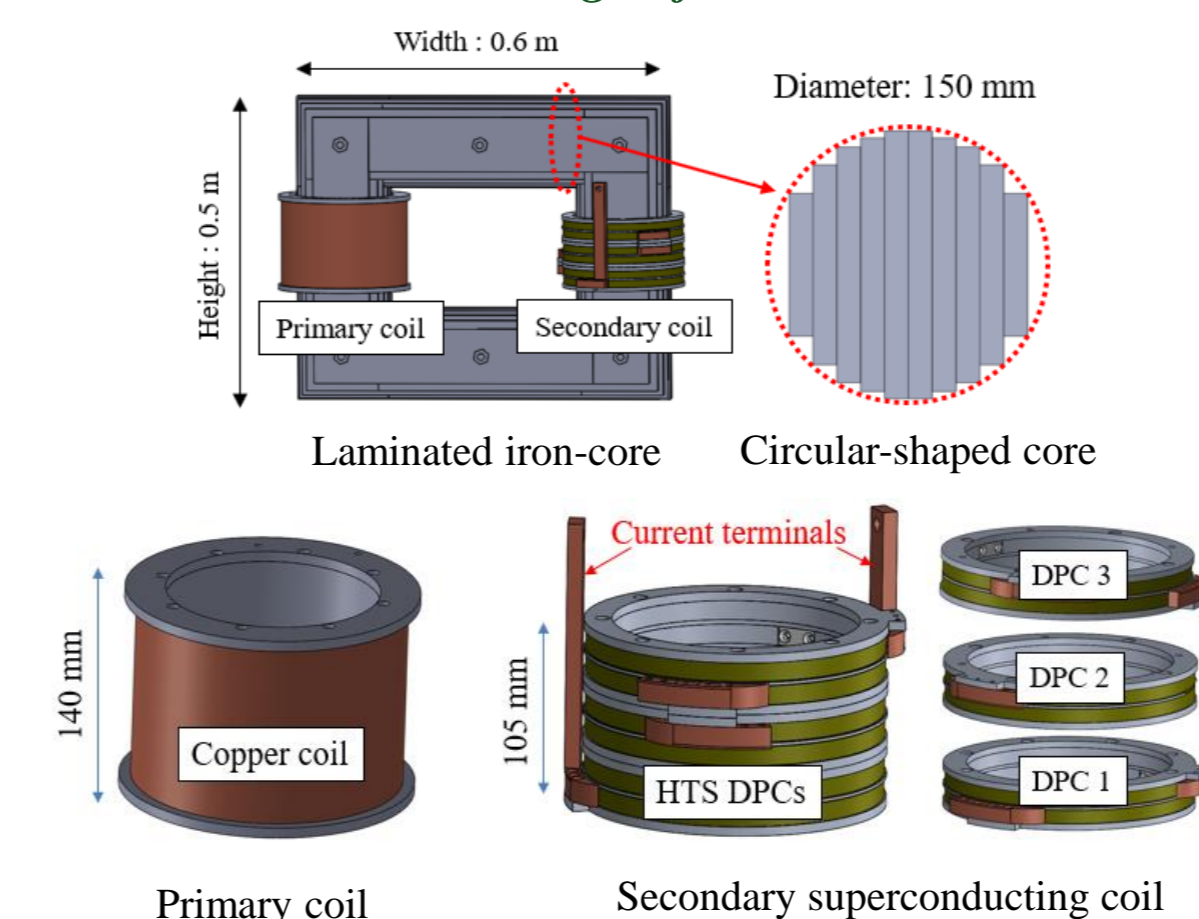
Detailed structure design of the lab-scale SI-SFCL
